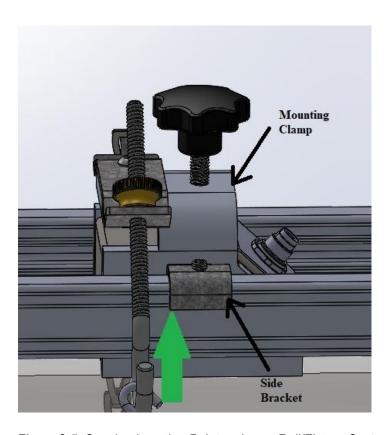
Spacing Locating Point on Large Rail/Fixture System
